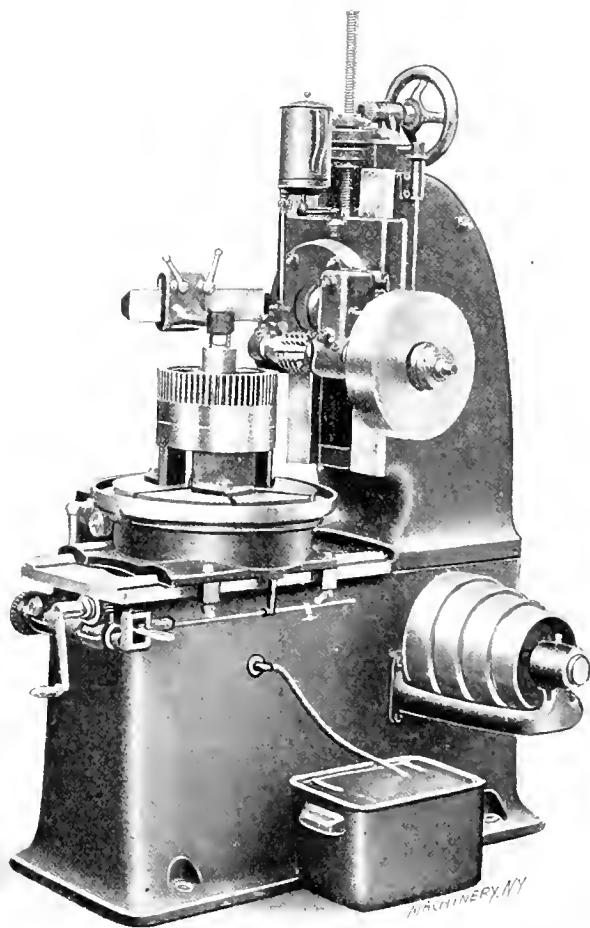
A Continental Gear Hobbing Machine, sold by Selig, Sonnenthal & Co.
